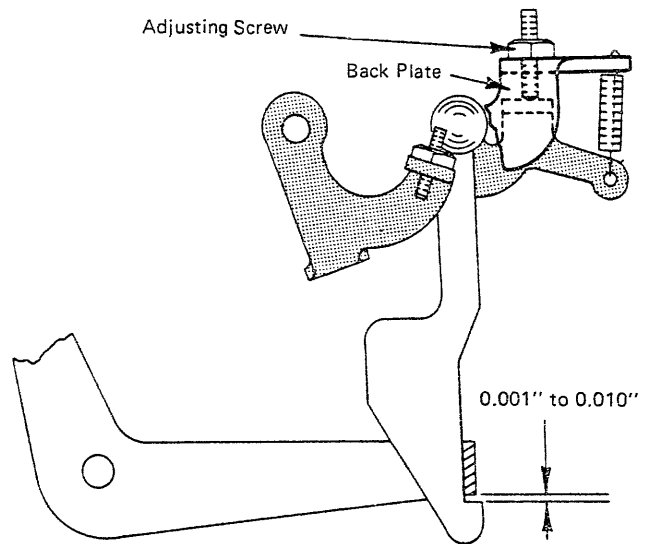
Carrier-Return Latch Height, 11-Inch Machine
